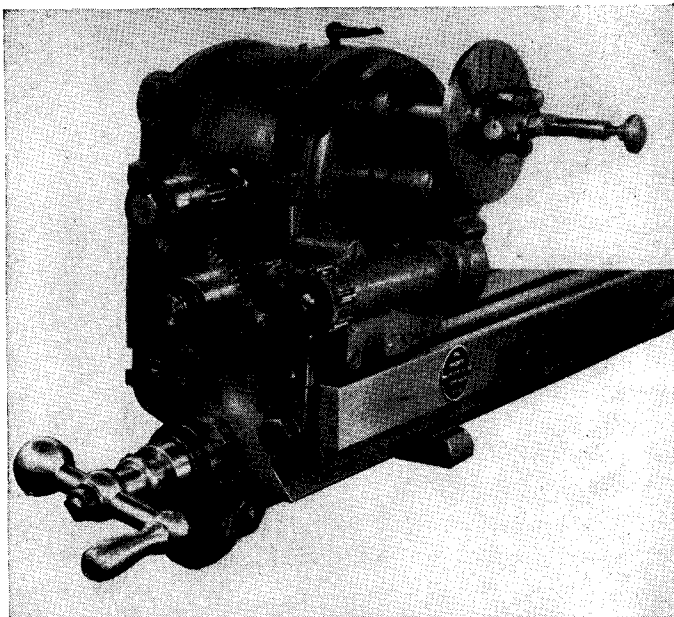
A Brown & Sharpe index head geared for 250 divisions (two idlers). (The Brown & Sharpe Manufacturing Company)
